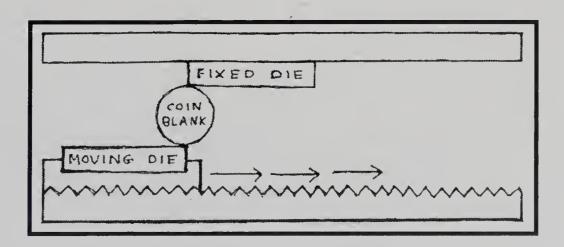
Schematic drawing of the starting position of a blank when it is about to pass between the fixed and moving dies in the Castaing machine. Here the moving die is completely retracted into its normal starting position and the blank will receive a complete set of edge letters.
